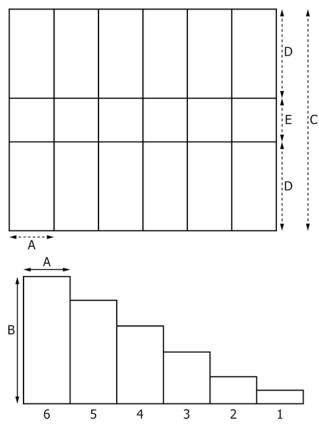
Step-Wedge Drawing (dimensions are listed in Table 1)
